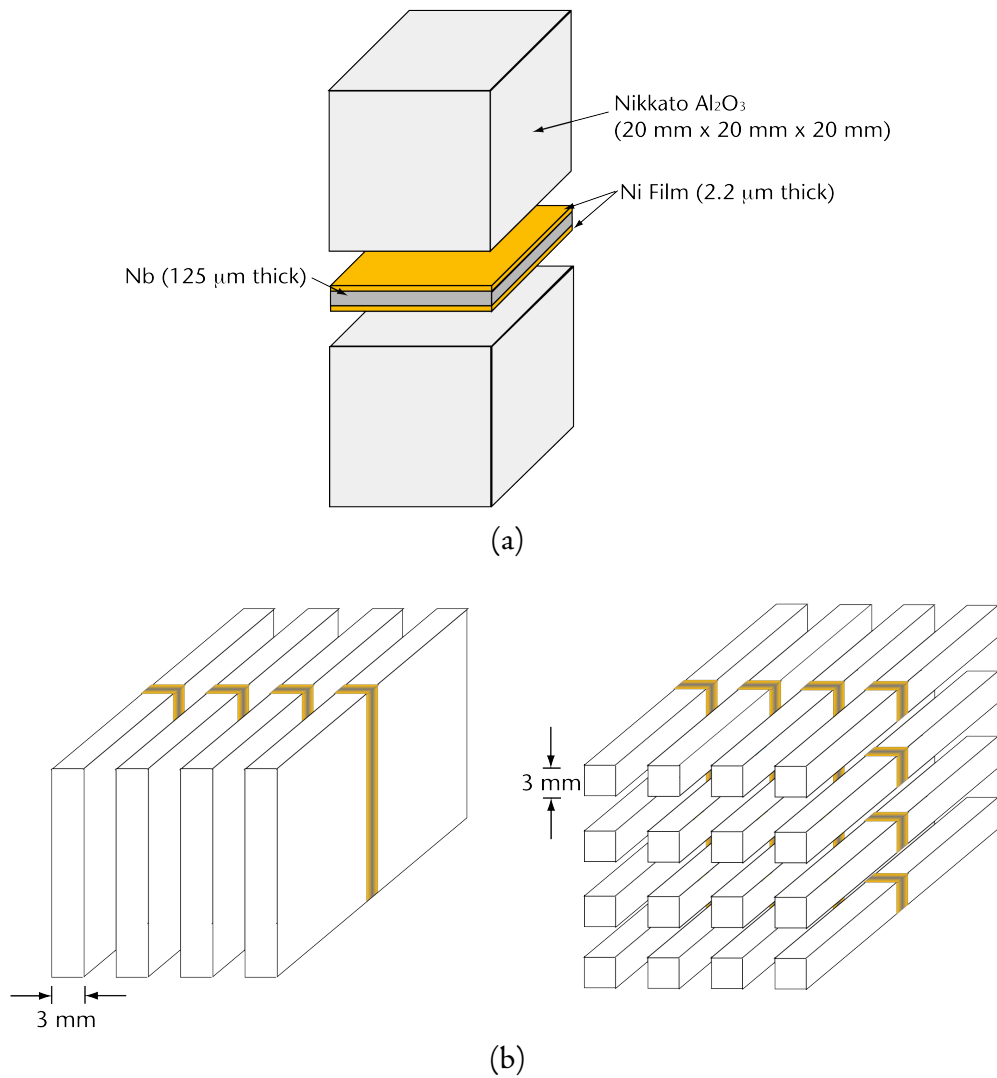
(a) Schematic of TLP joining assembly with Ni/Nb/Ni interlayer. (b) Joined blocks are machined into plates, which are then sectioned into beams to be used as four-point-bend-test specimens. The beams have dimensions 3 mm × 3 mm × 40 mm.
